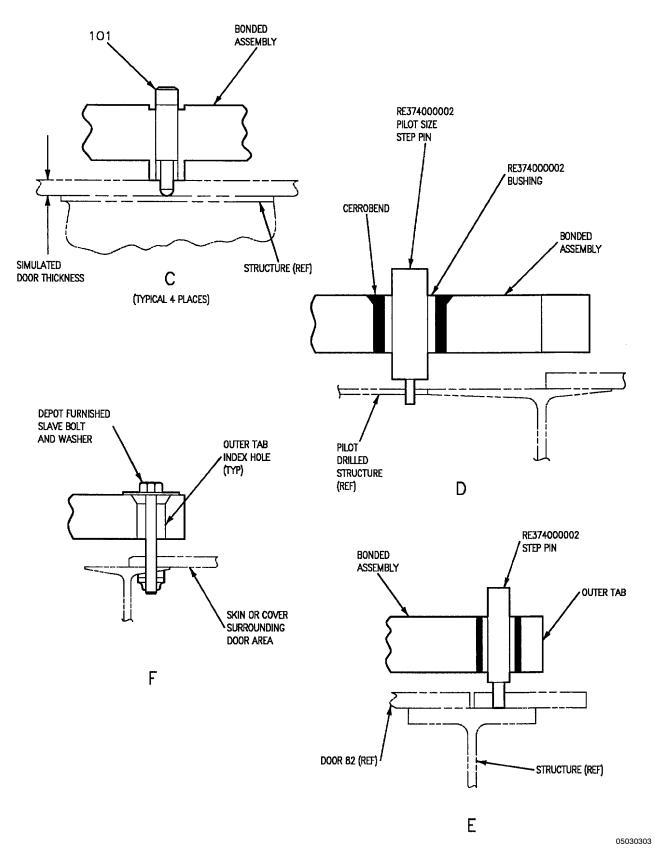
Installation of Plate Set for Drilling Door 82 and Substructure (Sheet 3)
